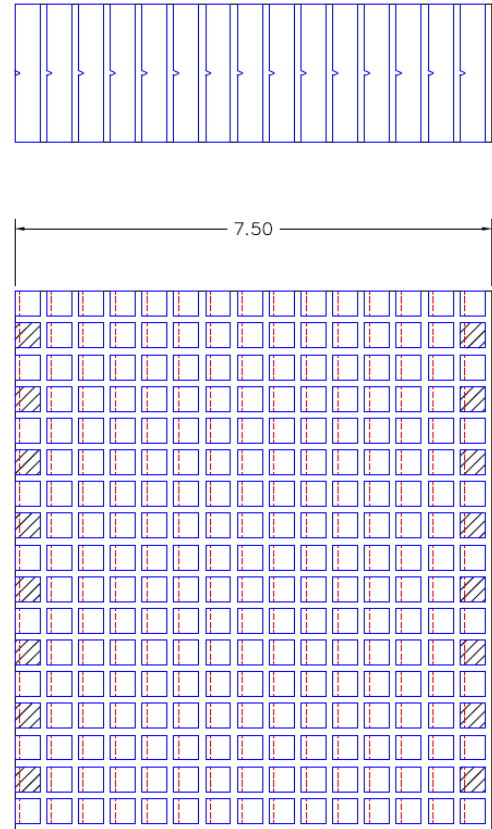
Layout for machining Charpy and tensile specimens from the block C2. Hatched blocks were machined into SS3 tensile specimens and coupons.
